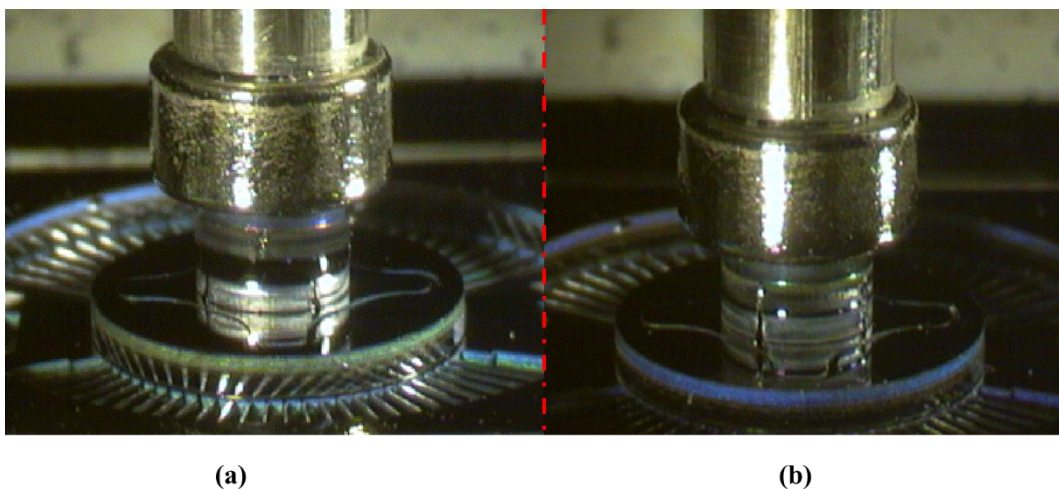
(a) Thrust Bearing before Loading; (b) Thrust Bearing after Loading
